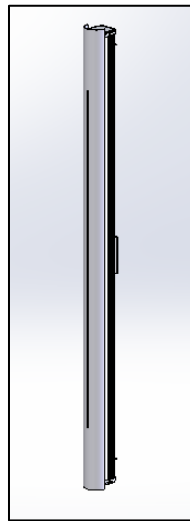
ARMET LUMINAIRE (AS SHOWN)
